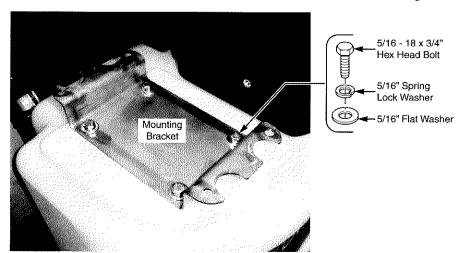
Assemble Mounting Bracket to LH Spray Tank
